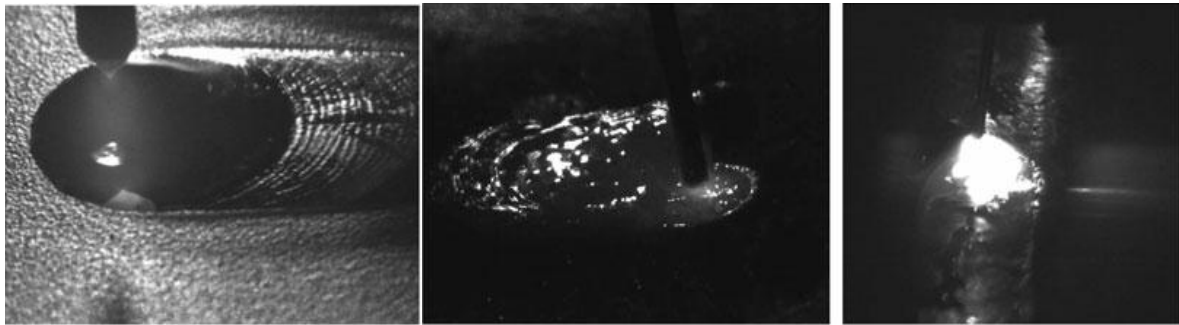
Viewing system with high-power laser diodes in near infrared for TIG (left) and MIG/MAG welding (center and right) [17, 4]
